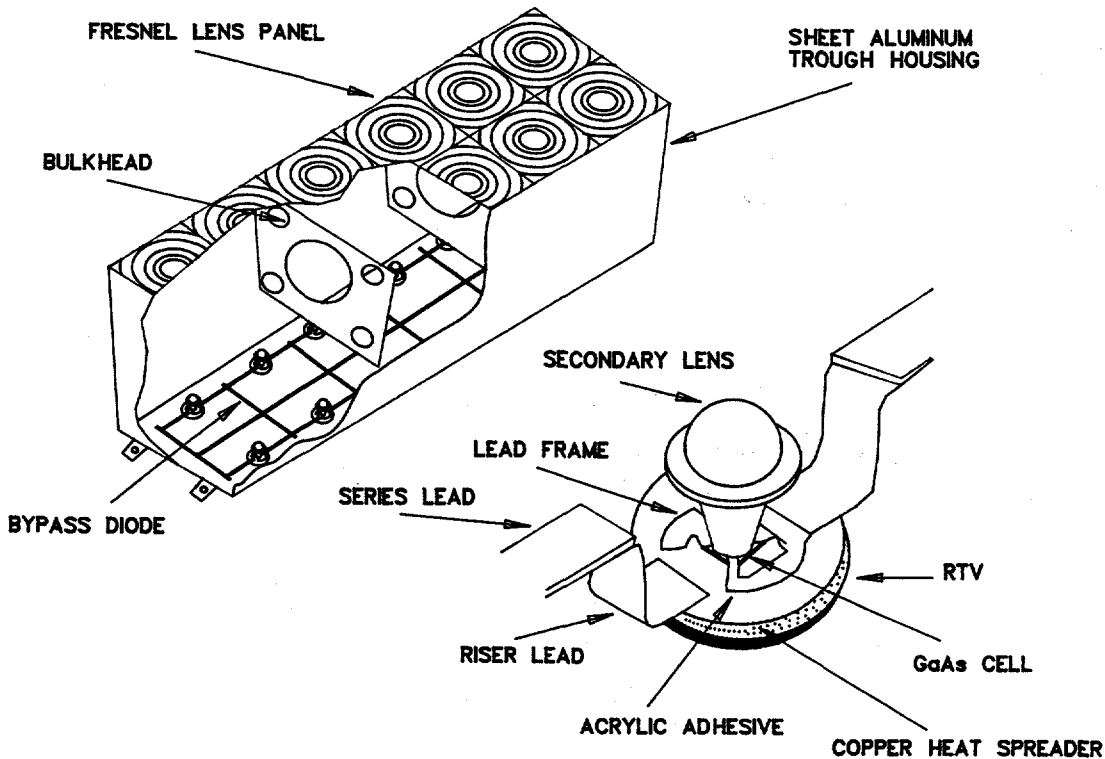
BASELINE RECEIVER/CELL ASSEMBLY AND 12 CELL MODULE WITH EXPLODED VIEW OF THE SOLAR CELL RECEIVER ASSEMBLY
